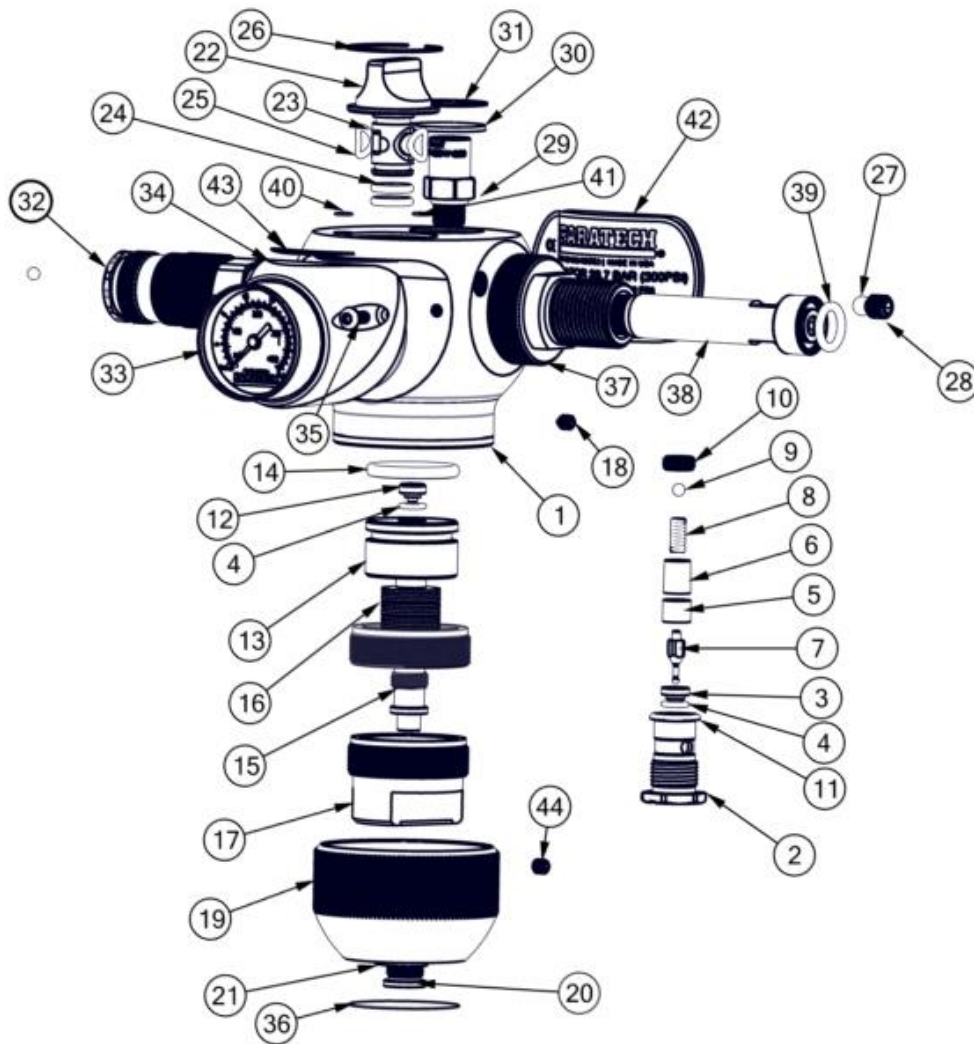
22-895400DG3 Adjustable Pressure Regulator Exploded View
